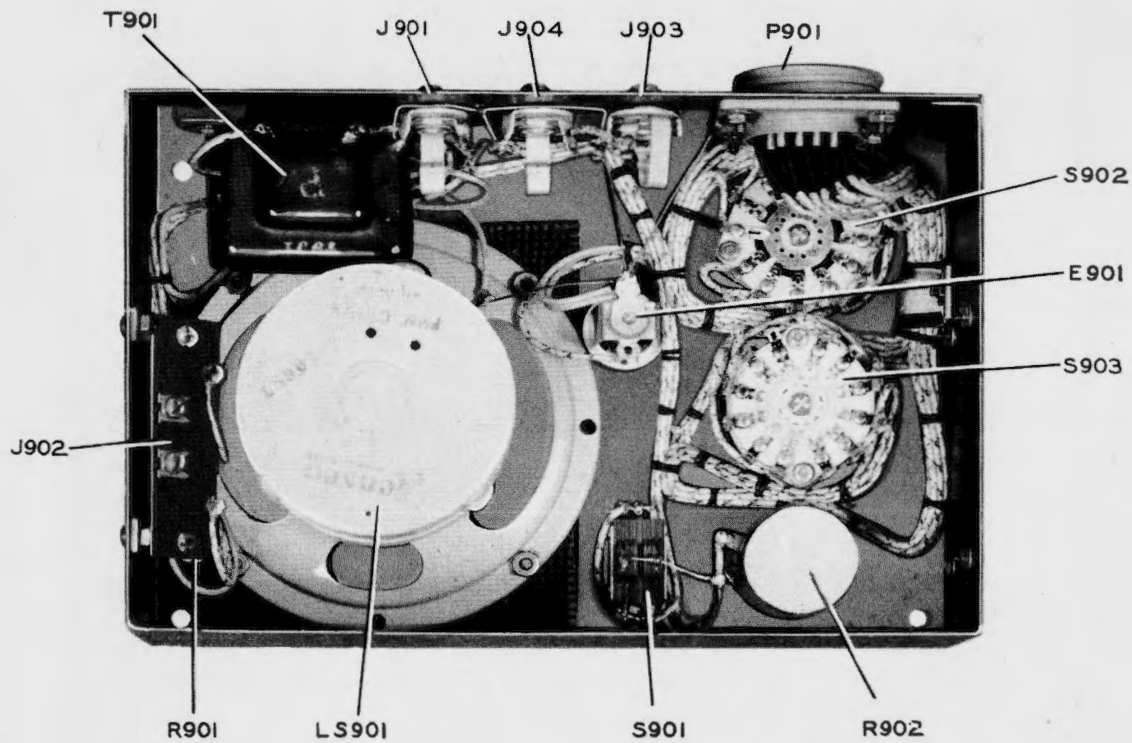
Navy Type COL-23410 Remote Control Unit - Bottom View
